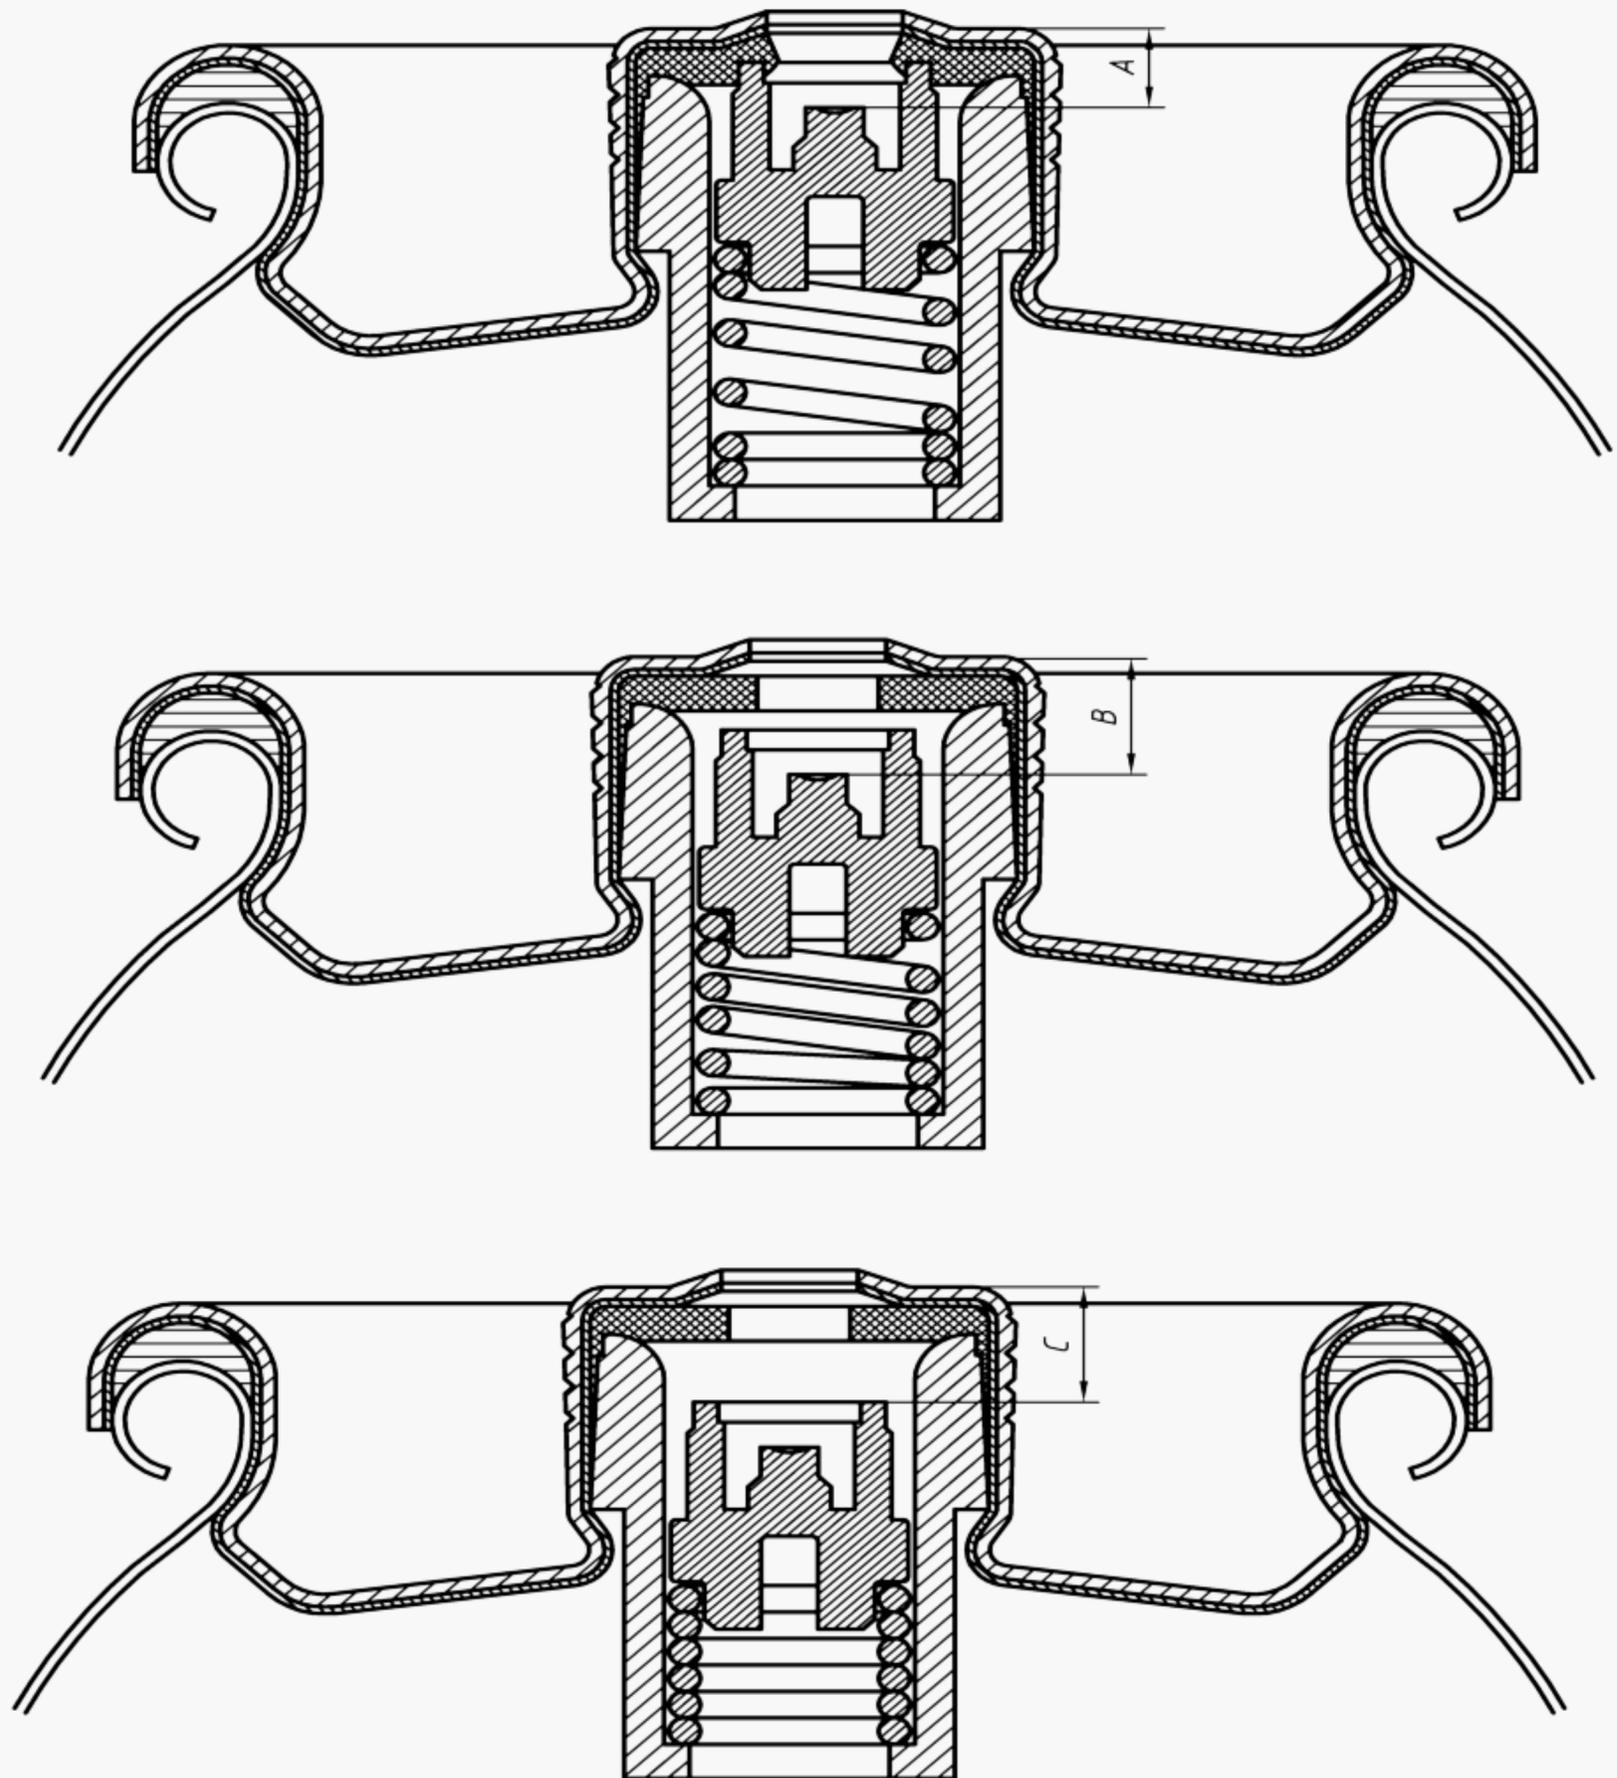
Section of a threaded centre boss valve cup (type 1)
